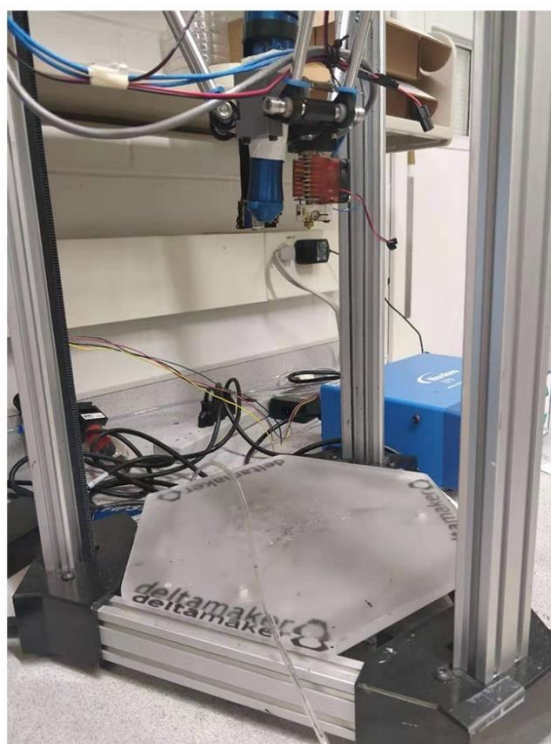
Fused filament fabrication (FFF) DeltaMaker 3D printer
